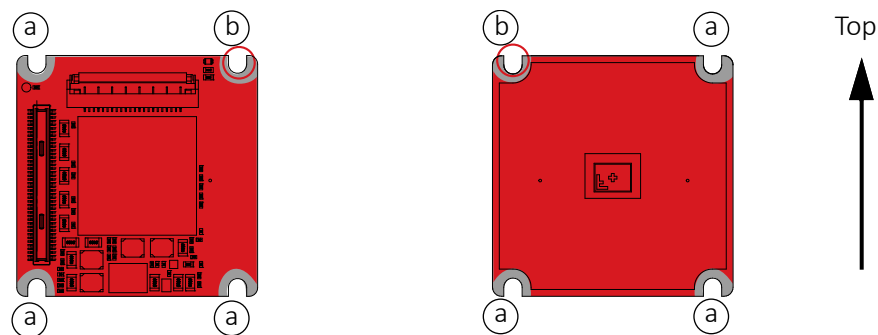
Mounting area of Alvium CSI-2 bare board cameras
